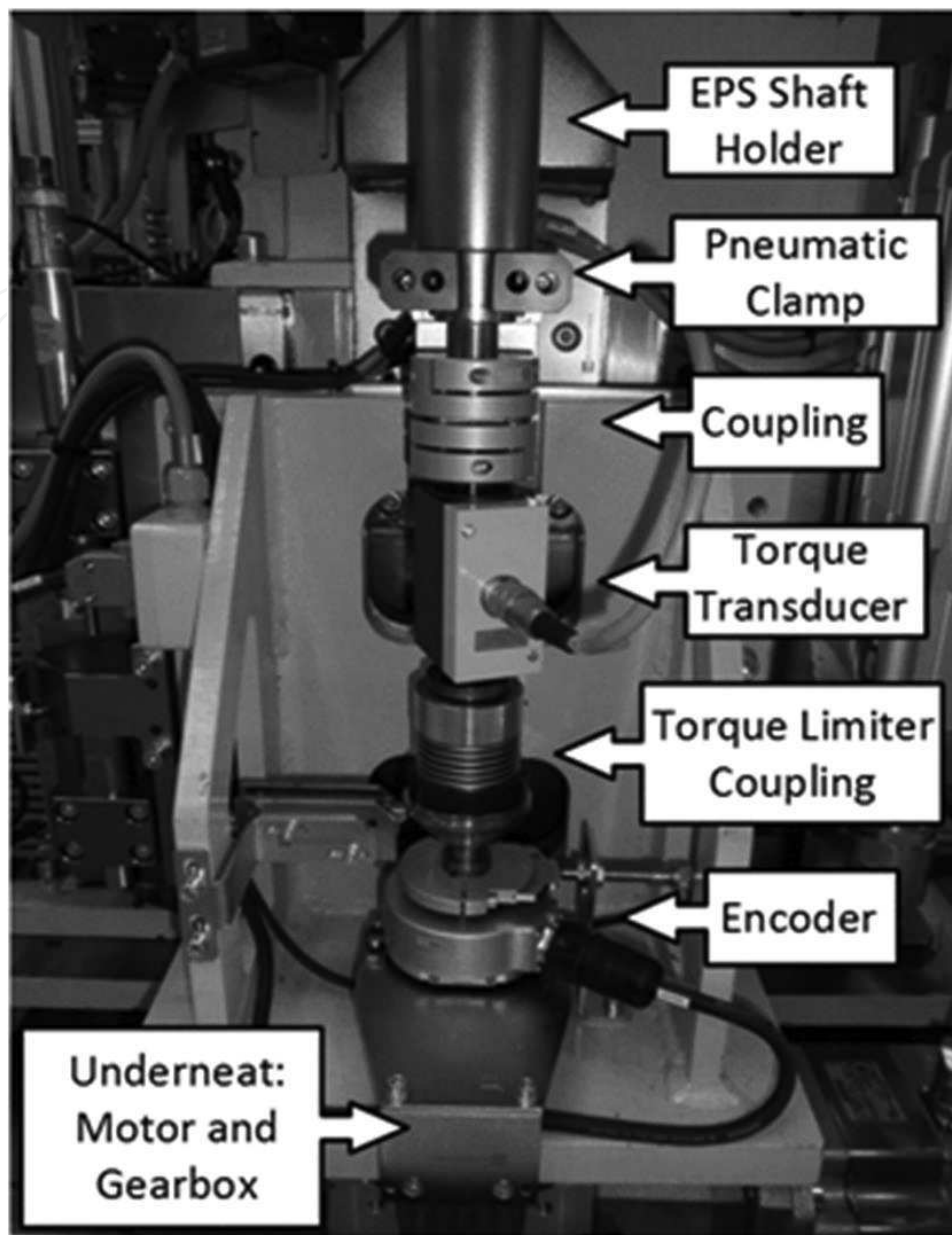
End-of-test machine, composed by a servomotor, a gearbox, an encoder, a torque transducer and a pneumatic clamp to hold the intermediate shaft of the EPS column.
